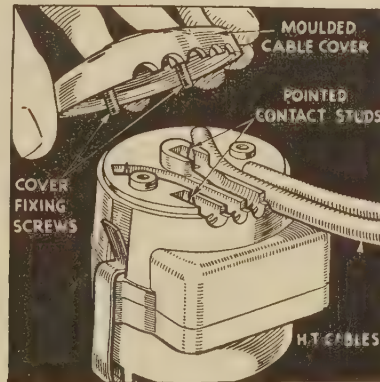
Showing Moulded Cover over H.T. Cable Connections.
